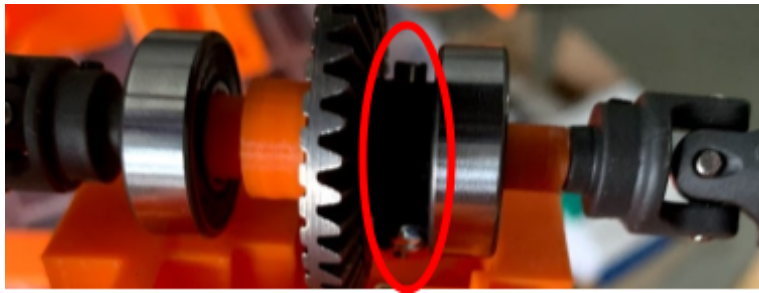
Highlight of Set Screw Through Shaft in Direct Drive
